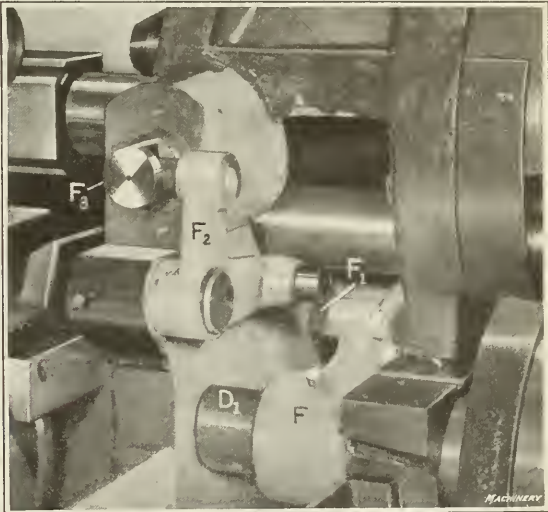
Detailed View, showing Geneva Stop Mechanism for indexing Spindle Carrier. View shows Position of Arm just after indexing
